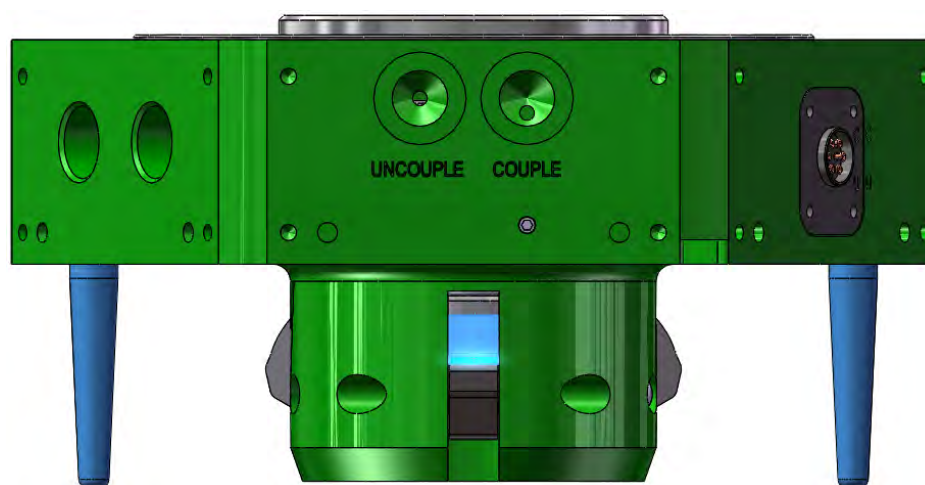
E125LP Robot Adaptor Lubrication – Locating Pins & Cams
